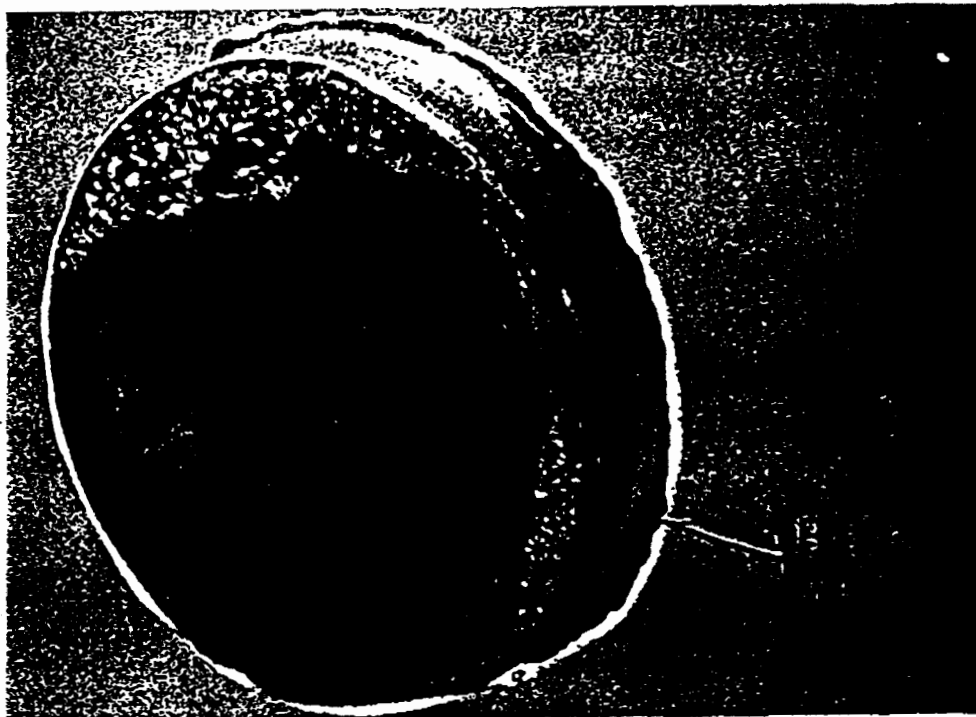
Tantalum Inner Container End Plug Showing Broken Weld
